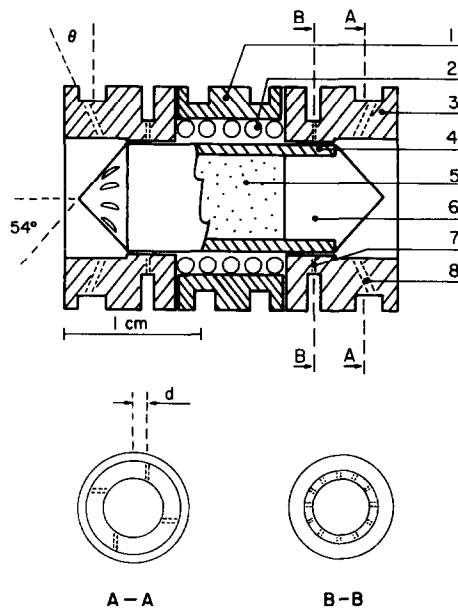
Rotor and stator: (1) center coil section, (2) NMR coil, (3) drive and bearing section, (4) rotor tube, (5) sample chamber, (6) rotor cap, (7) gas bearing inlet hole, (8) turbine drive inlet hole.
